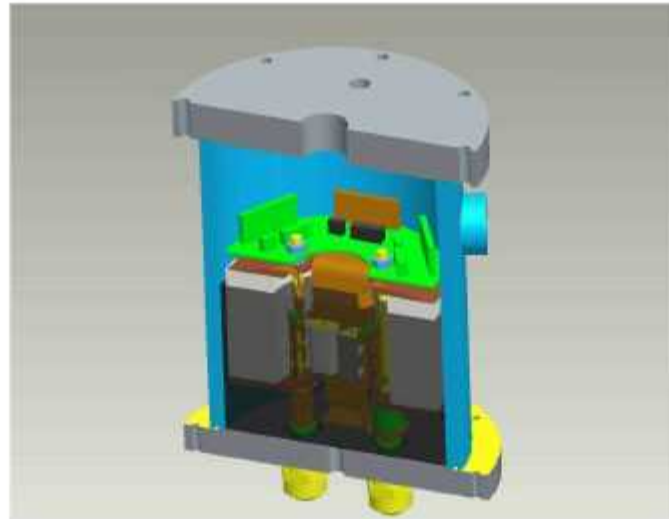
A three-dimensional model of the ORNL prototype showing assembly components.
